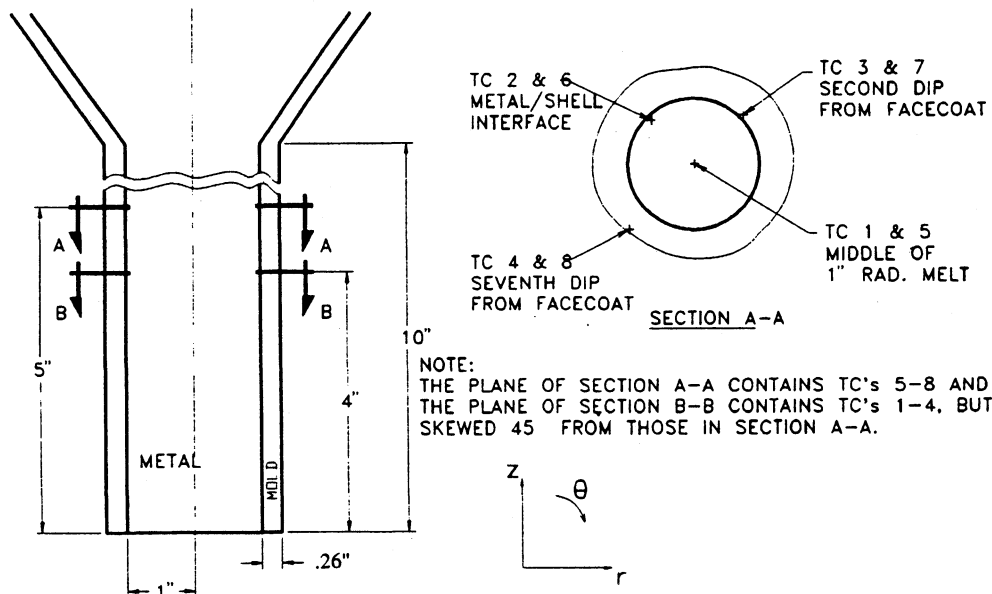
Placement and location of the thermocouples for the cylindrical casting (sketch is not to scale; the mold sat on 1.5-in.-thick insulation).
